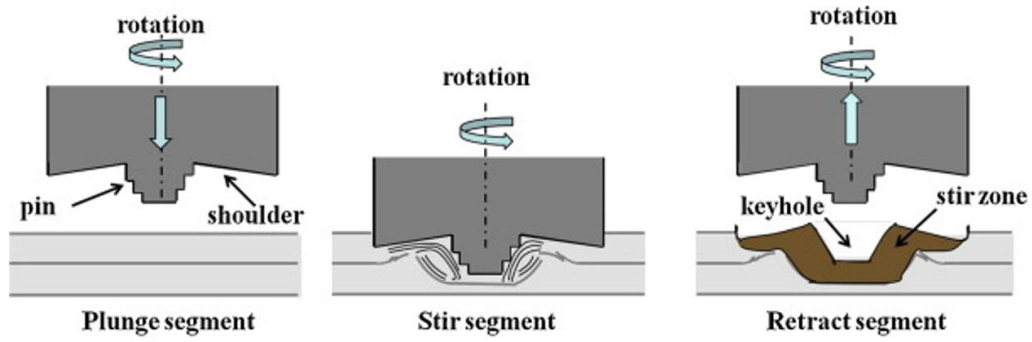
Schematic illustration of friction stir spot welding [22].
